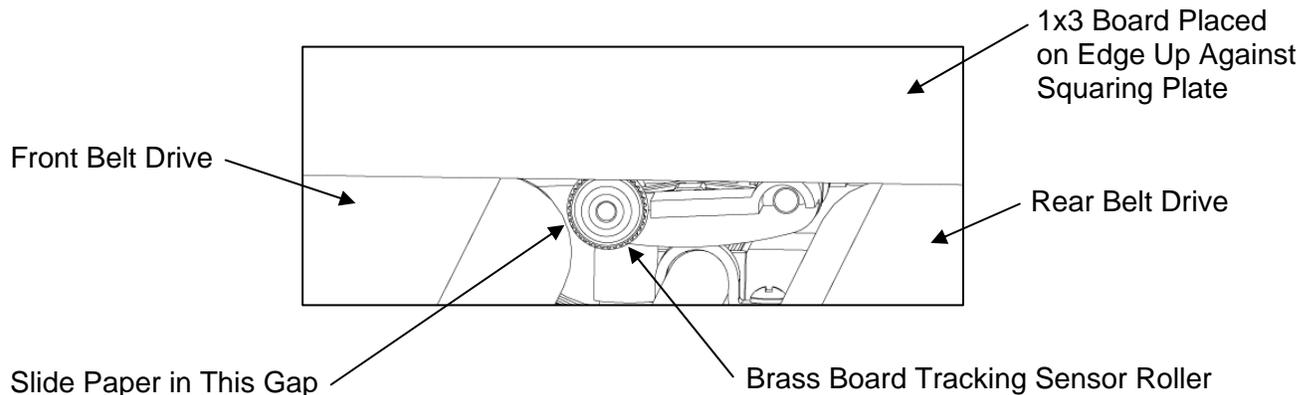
CHECKING CLEARANCE OF THE BOARD TRACKING SENSOR
